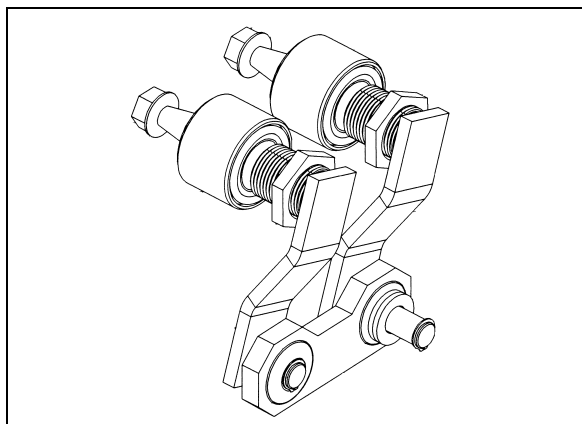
DRIVING MECHANISM (DRIVER SIDE) 23284
